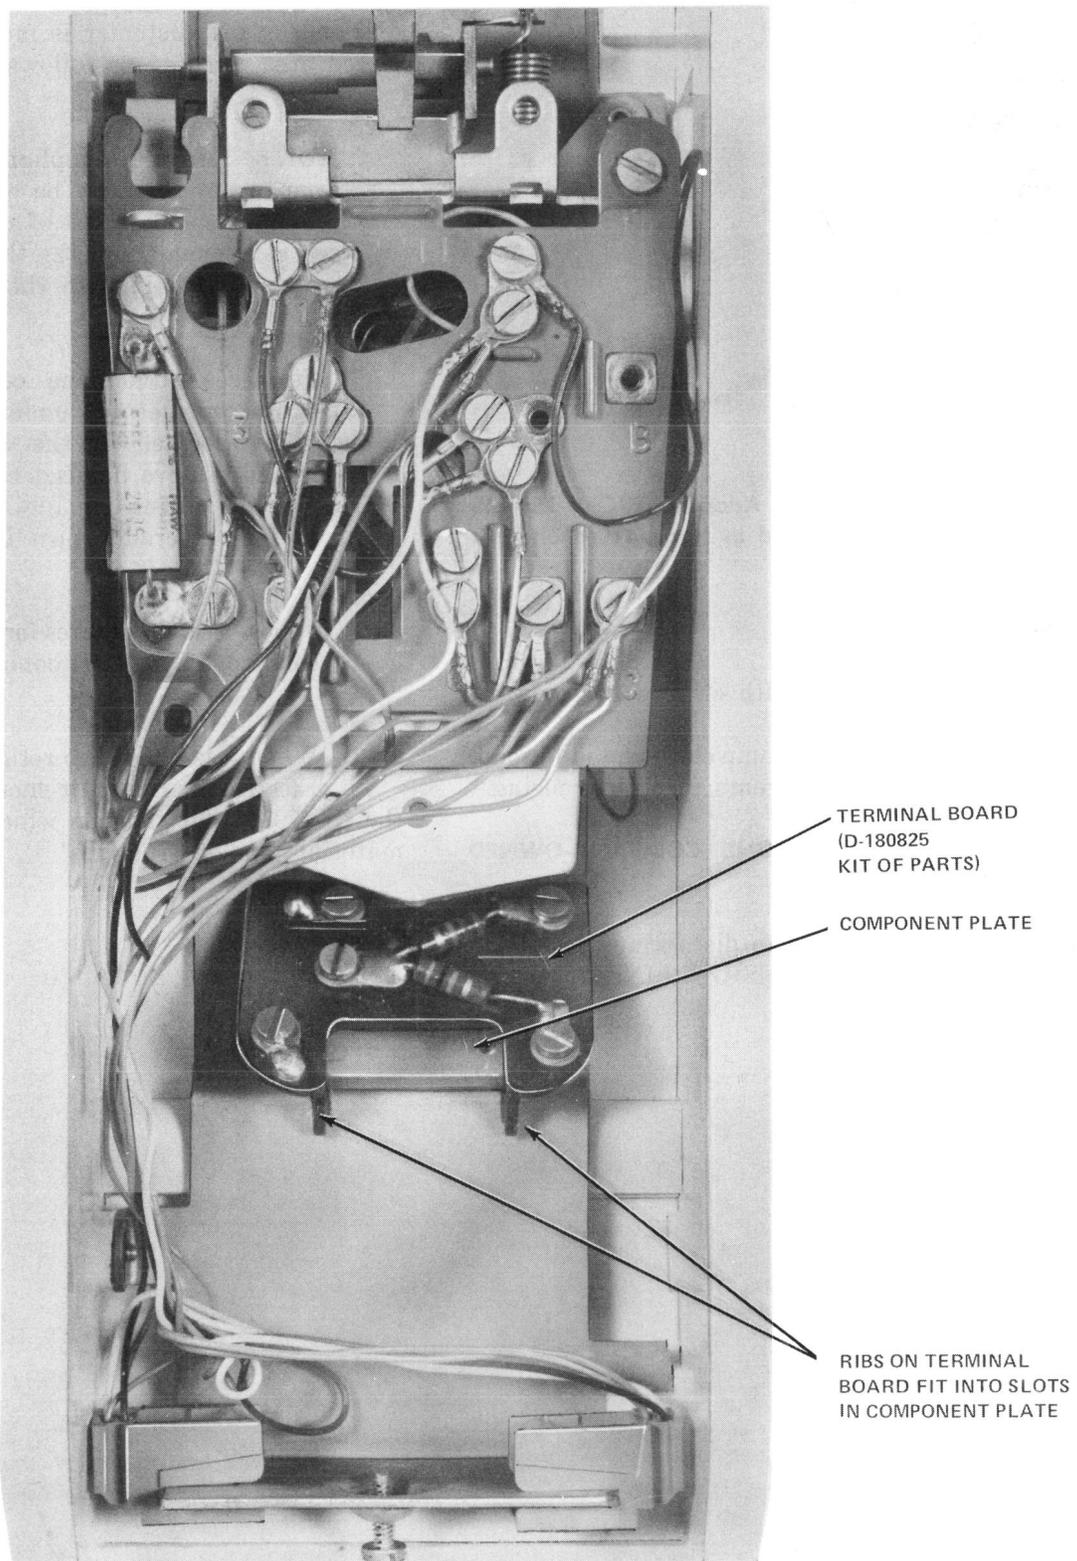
Terminal Board (P/O D-180825 Kit of Parts) Installed in Housing
